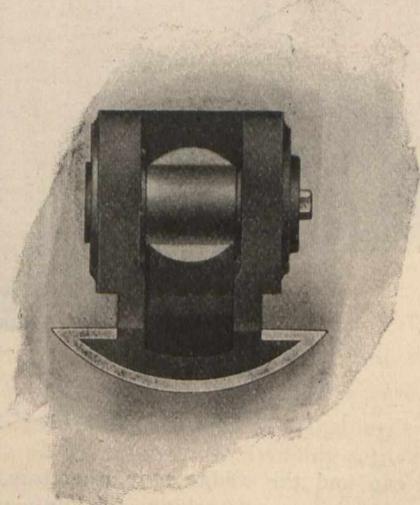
Cross-head of Medium-speed four-valve Engine.
